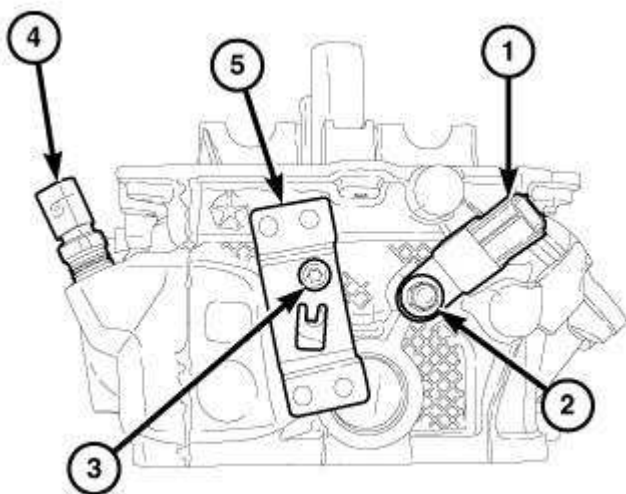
ECT Sensor, Ignition Coil Capacitor, Engine Wire Harness Retainer Bracket & Bolts
